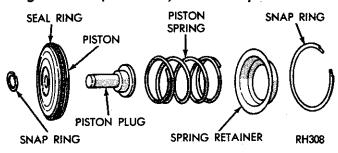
Rear (Low-Reverse) Servo Components—All FRONT SERVO ASSEMBLY
